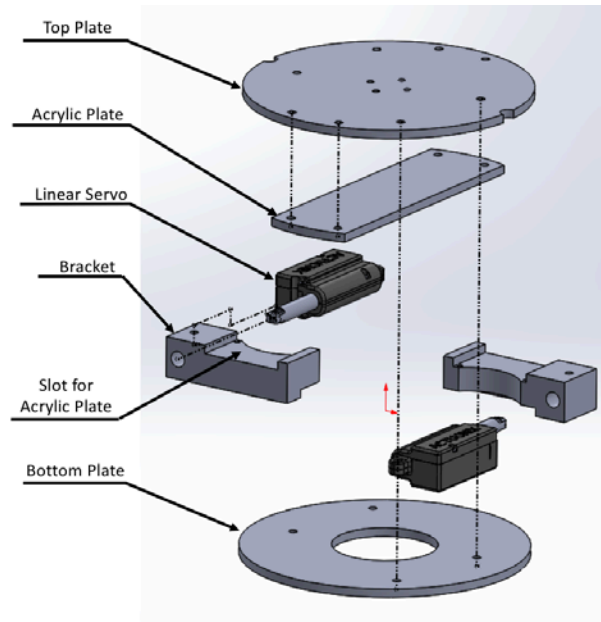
FOIL CUTTER, FINAL DESIGN DETAIL
